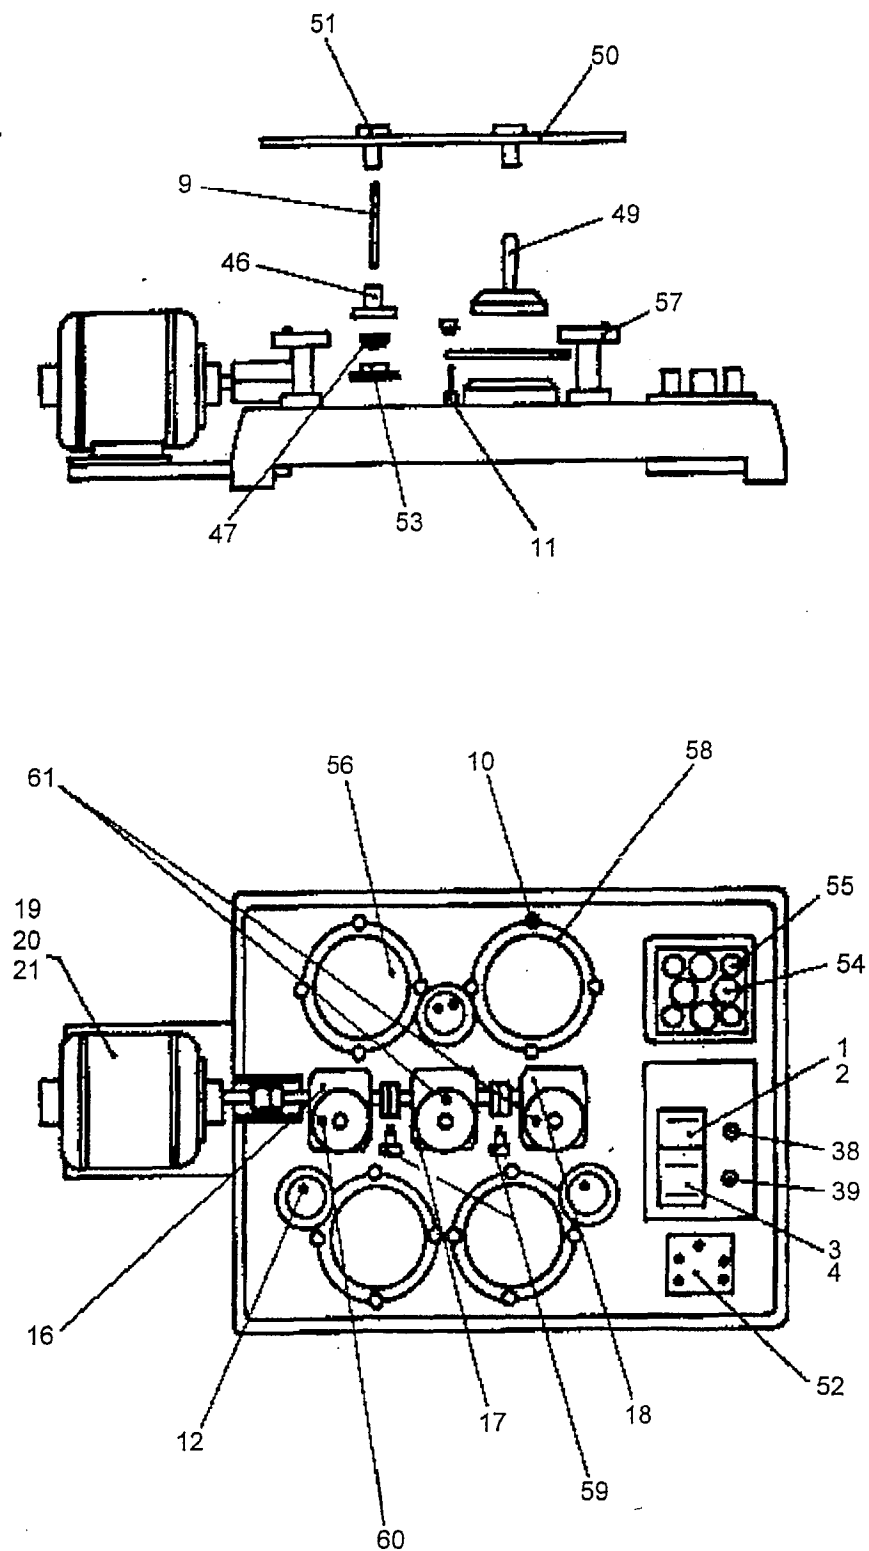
ADDITIONAL DRIVE COMPONENTS (60HZ MACHINES ONLY)
